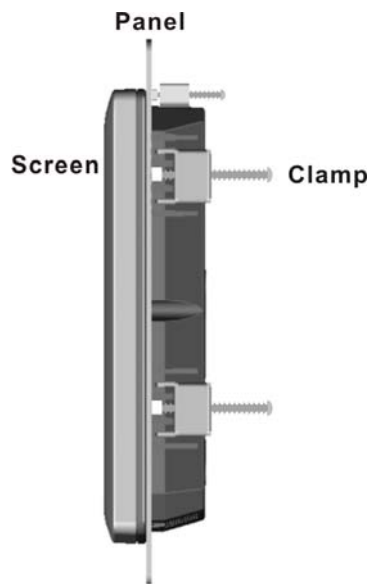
Tighten the Panel Mounting Clamp Screws
